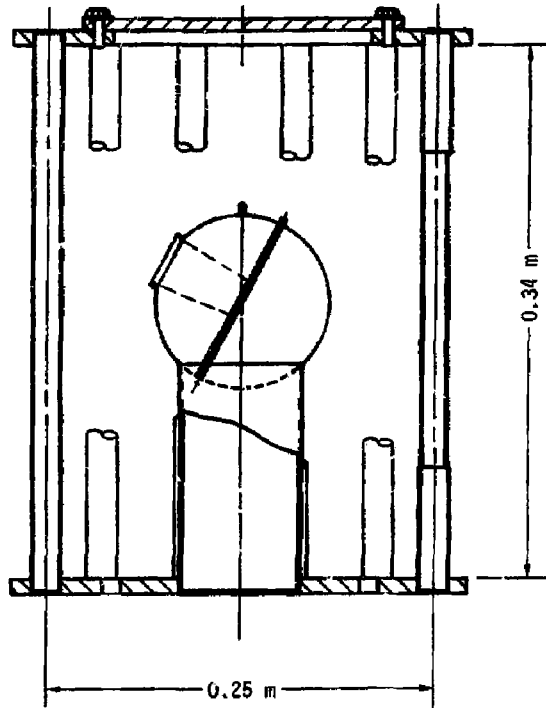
Special birdcage container that was made to allow safe assembly of the pulsed sphere. (Taken from LLL drawing AAA 76-118148-0B).
